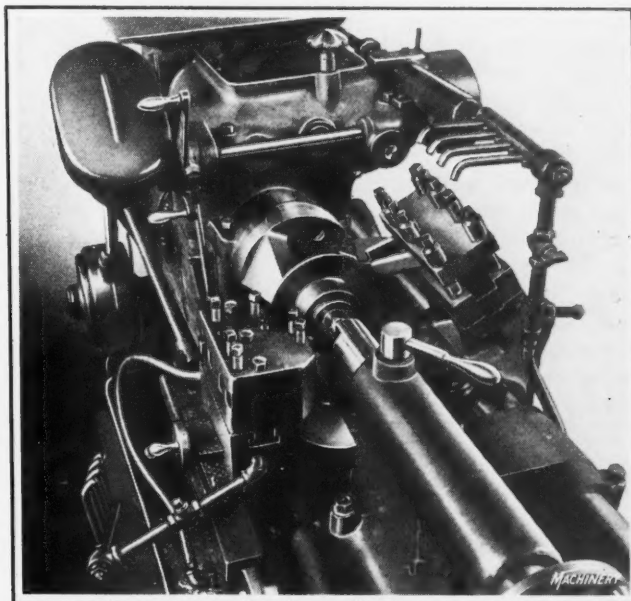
Another Tooling Equipment for machining a Rear Hub in a Fay Automatic Lathe
